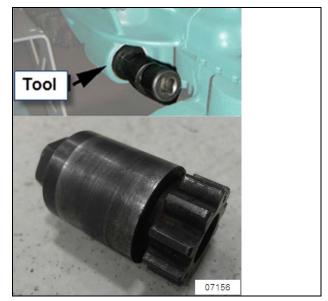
VOLVO ENGINE TURNING TOOL #88800014
